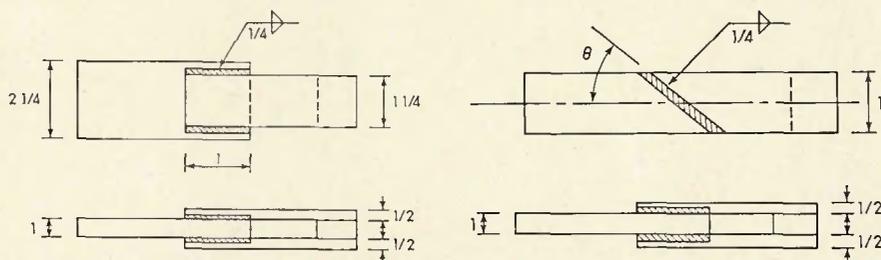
Schematic representation of coupons. A (left)—longitudinal weld coupons; B (right)—inclined weld coupons
